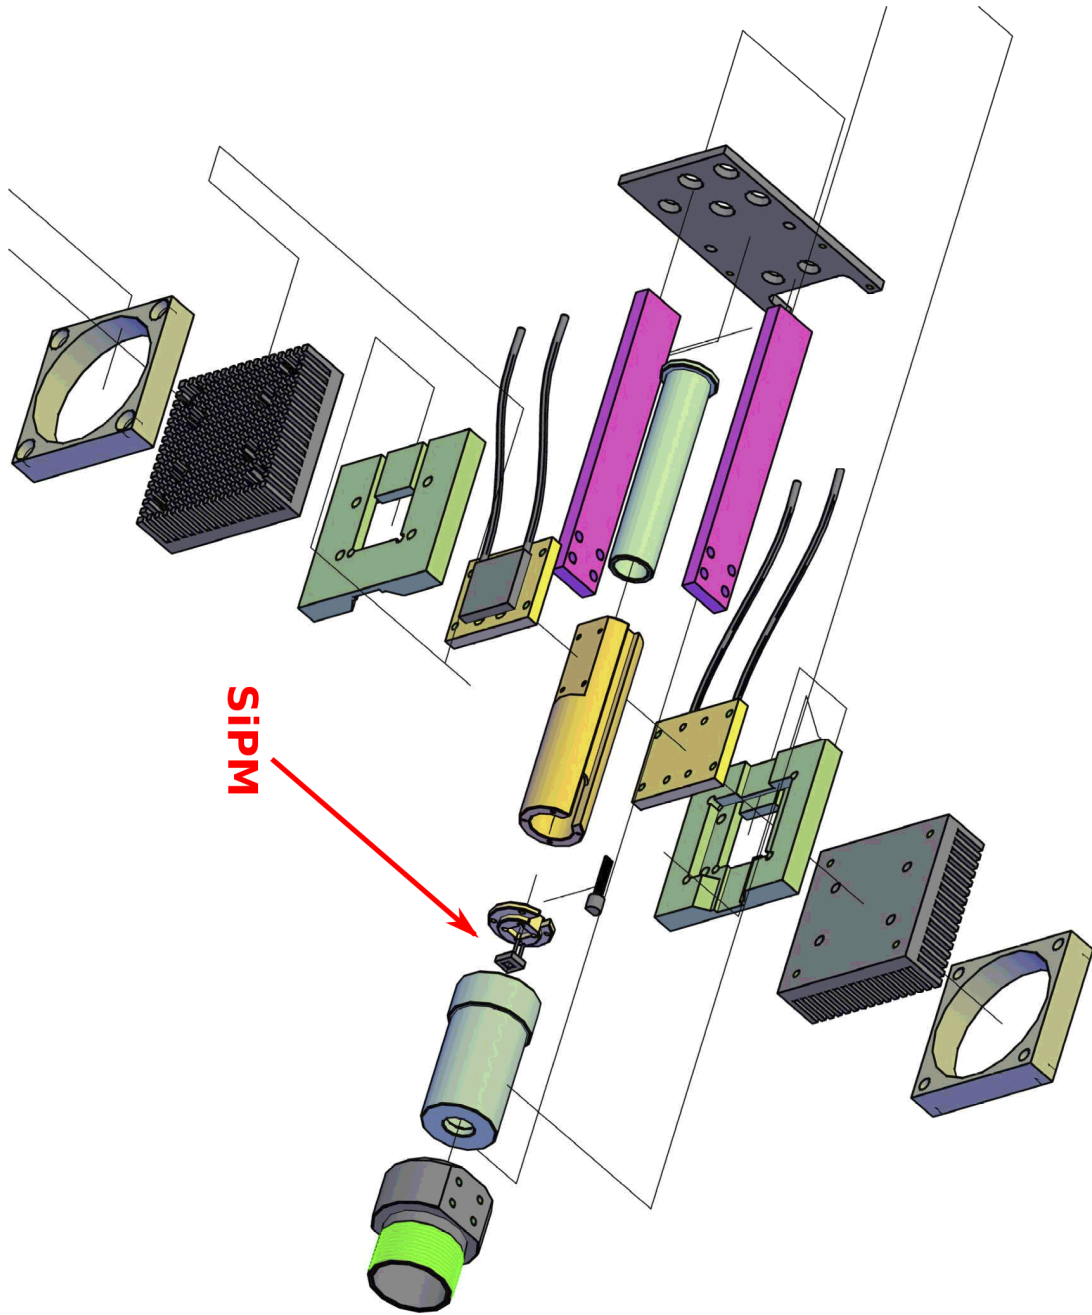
Exploded drawing of the SiPM cooling mount. Image from [35]
